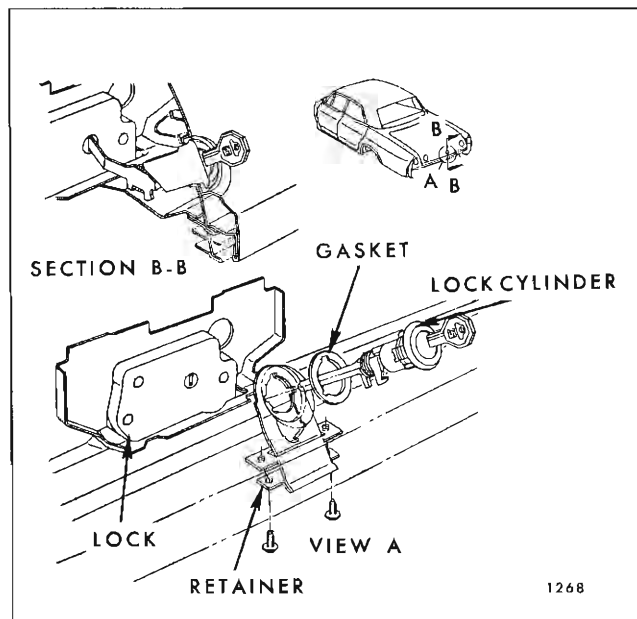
F8—Rear Compartment Lid Lock Cylinder
